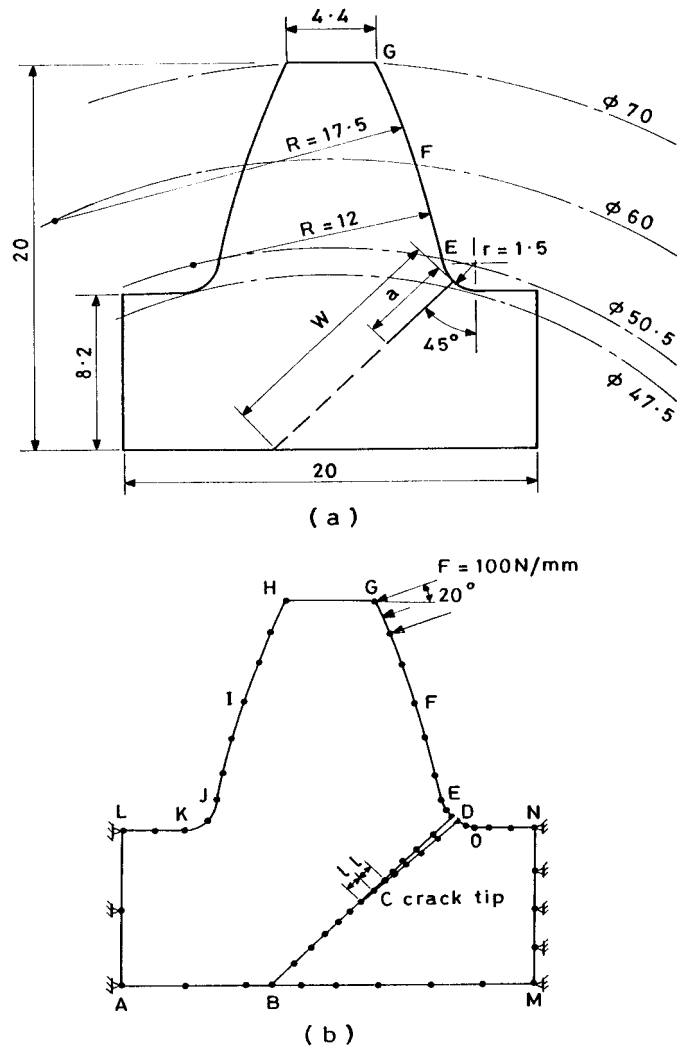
Gear tooth with edge crack. (a) Geometry, and (b) boundary element mesh.
